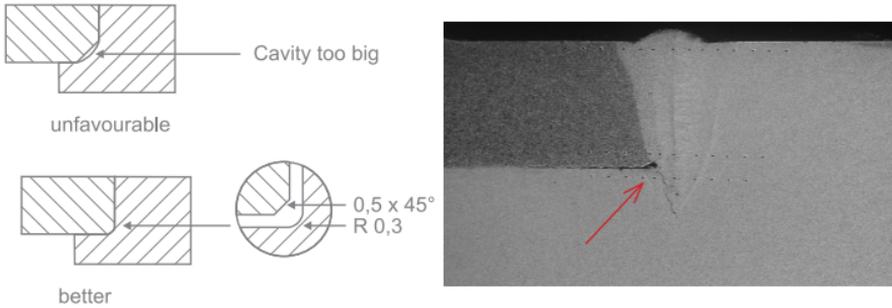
Left: Cavity permissible after processing. Right: Crack along the seam flank and to the weld root, starting from a cavity partly filled with melt
